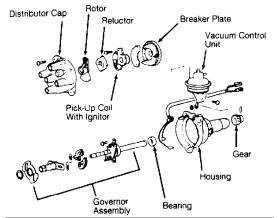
Exploded View of Distributor (MPV 3.0L) Courtesy of Mazda Motors Corp.
